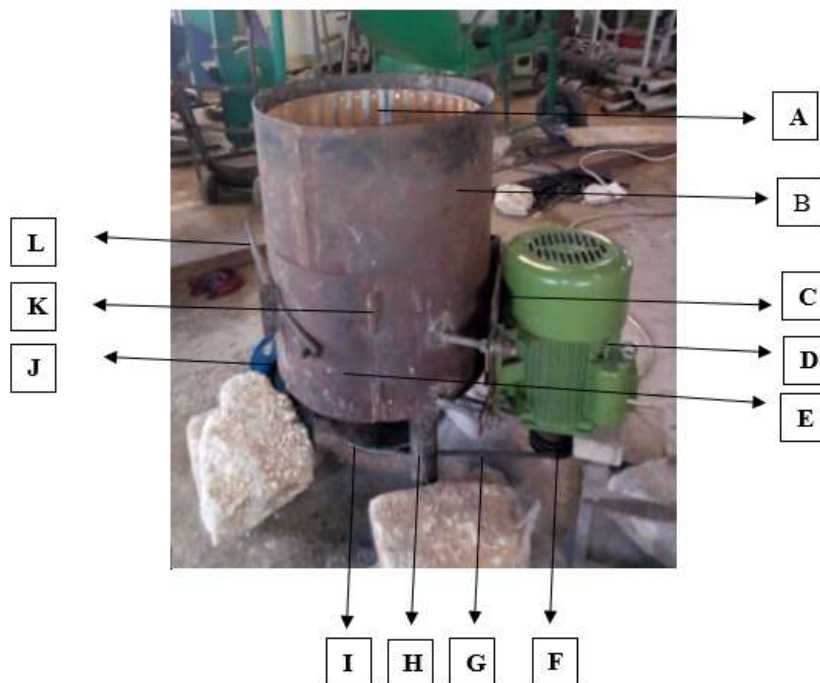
Motorized cassava peeler prototype. A, Lining assembly; B, Cylindrical drum; C, Motor seat assembly; D, Electrical motor; E, Gate; F, Driver pulley; G, V-belt; H, Stand; I, Driven pulley; J, Peel spout; K, Gate hinge; L, Gate handle/lock.
